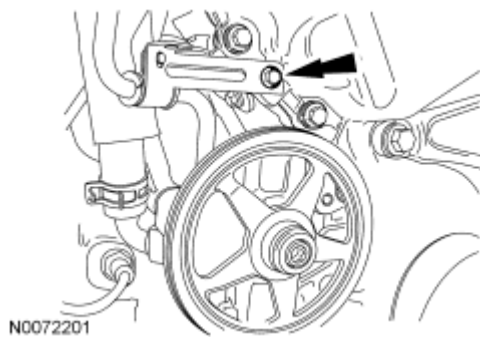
Identifying Bracket-To-Power Steering Pump Bolt
